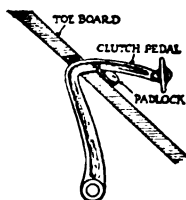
One method of locking a car. Hole is drilled in clutch pedal arm for the insertion of a padlock. Prevents use of clutch.
